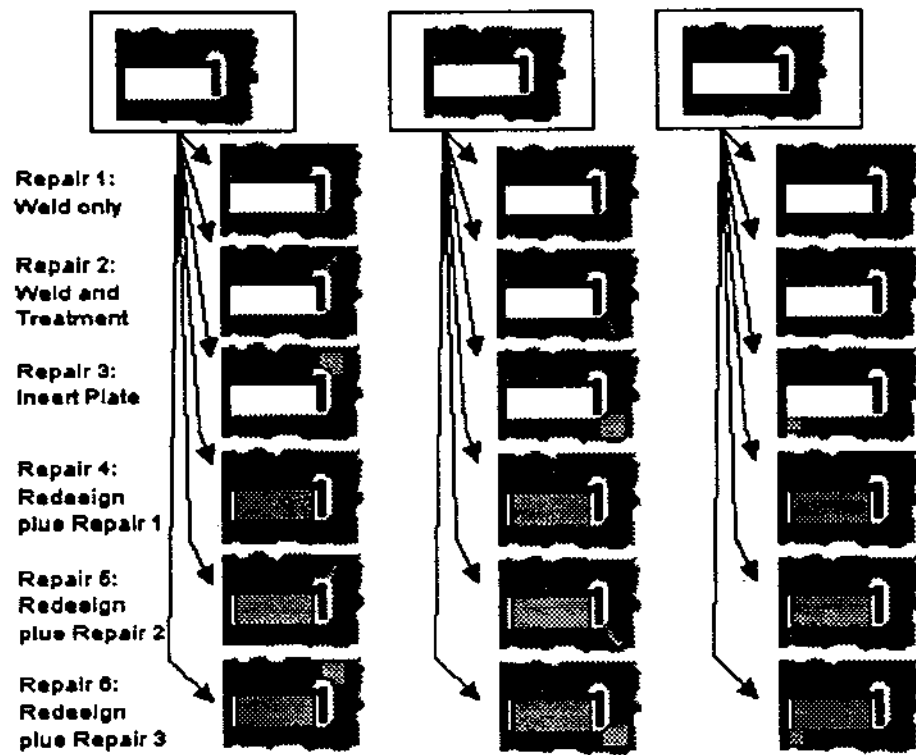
Repair alternatives for cracks in longitudinal cutouts
